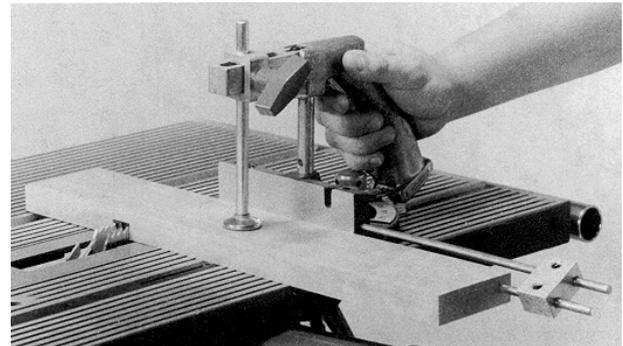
A dado is a U-shaped cut made across the grain. Use the miter gauge stop rod when you need the same cut on more than one piece.
